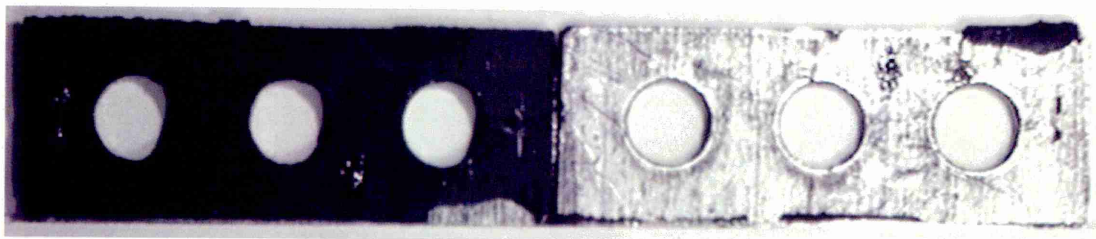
Oxalic acid etched fracture surface after environmental exposure
